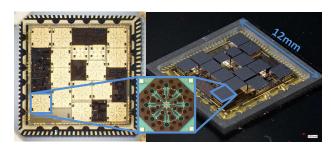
Left: SiGe chip in QFN not populated with switch chiplets; Center: Front-side view of 8-port PCS chiplet; Right: Optical photograph of a fully assembled receive RF-FPGA in QFN package.
